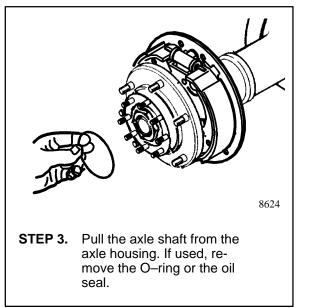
DISASSEMBLY OF THE DRIVE AXLE (1 of 2) (TYPE 1 SHOWN)
